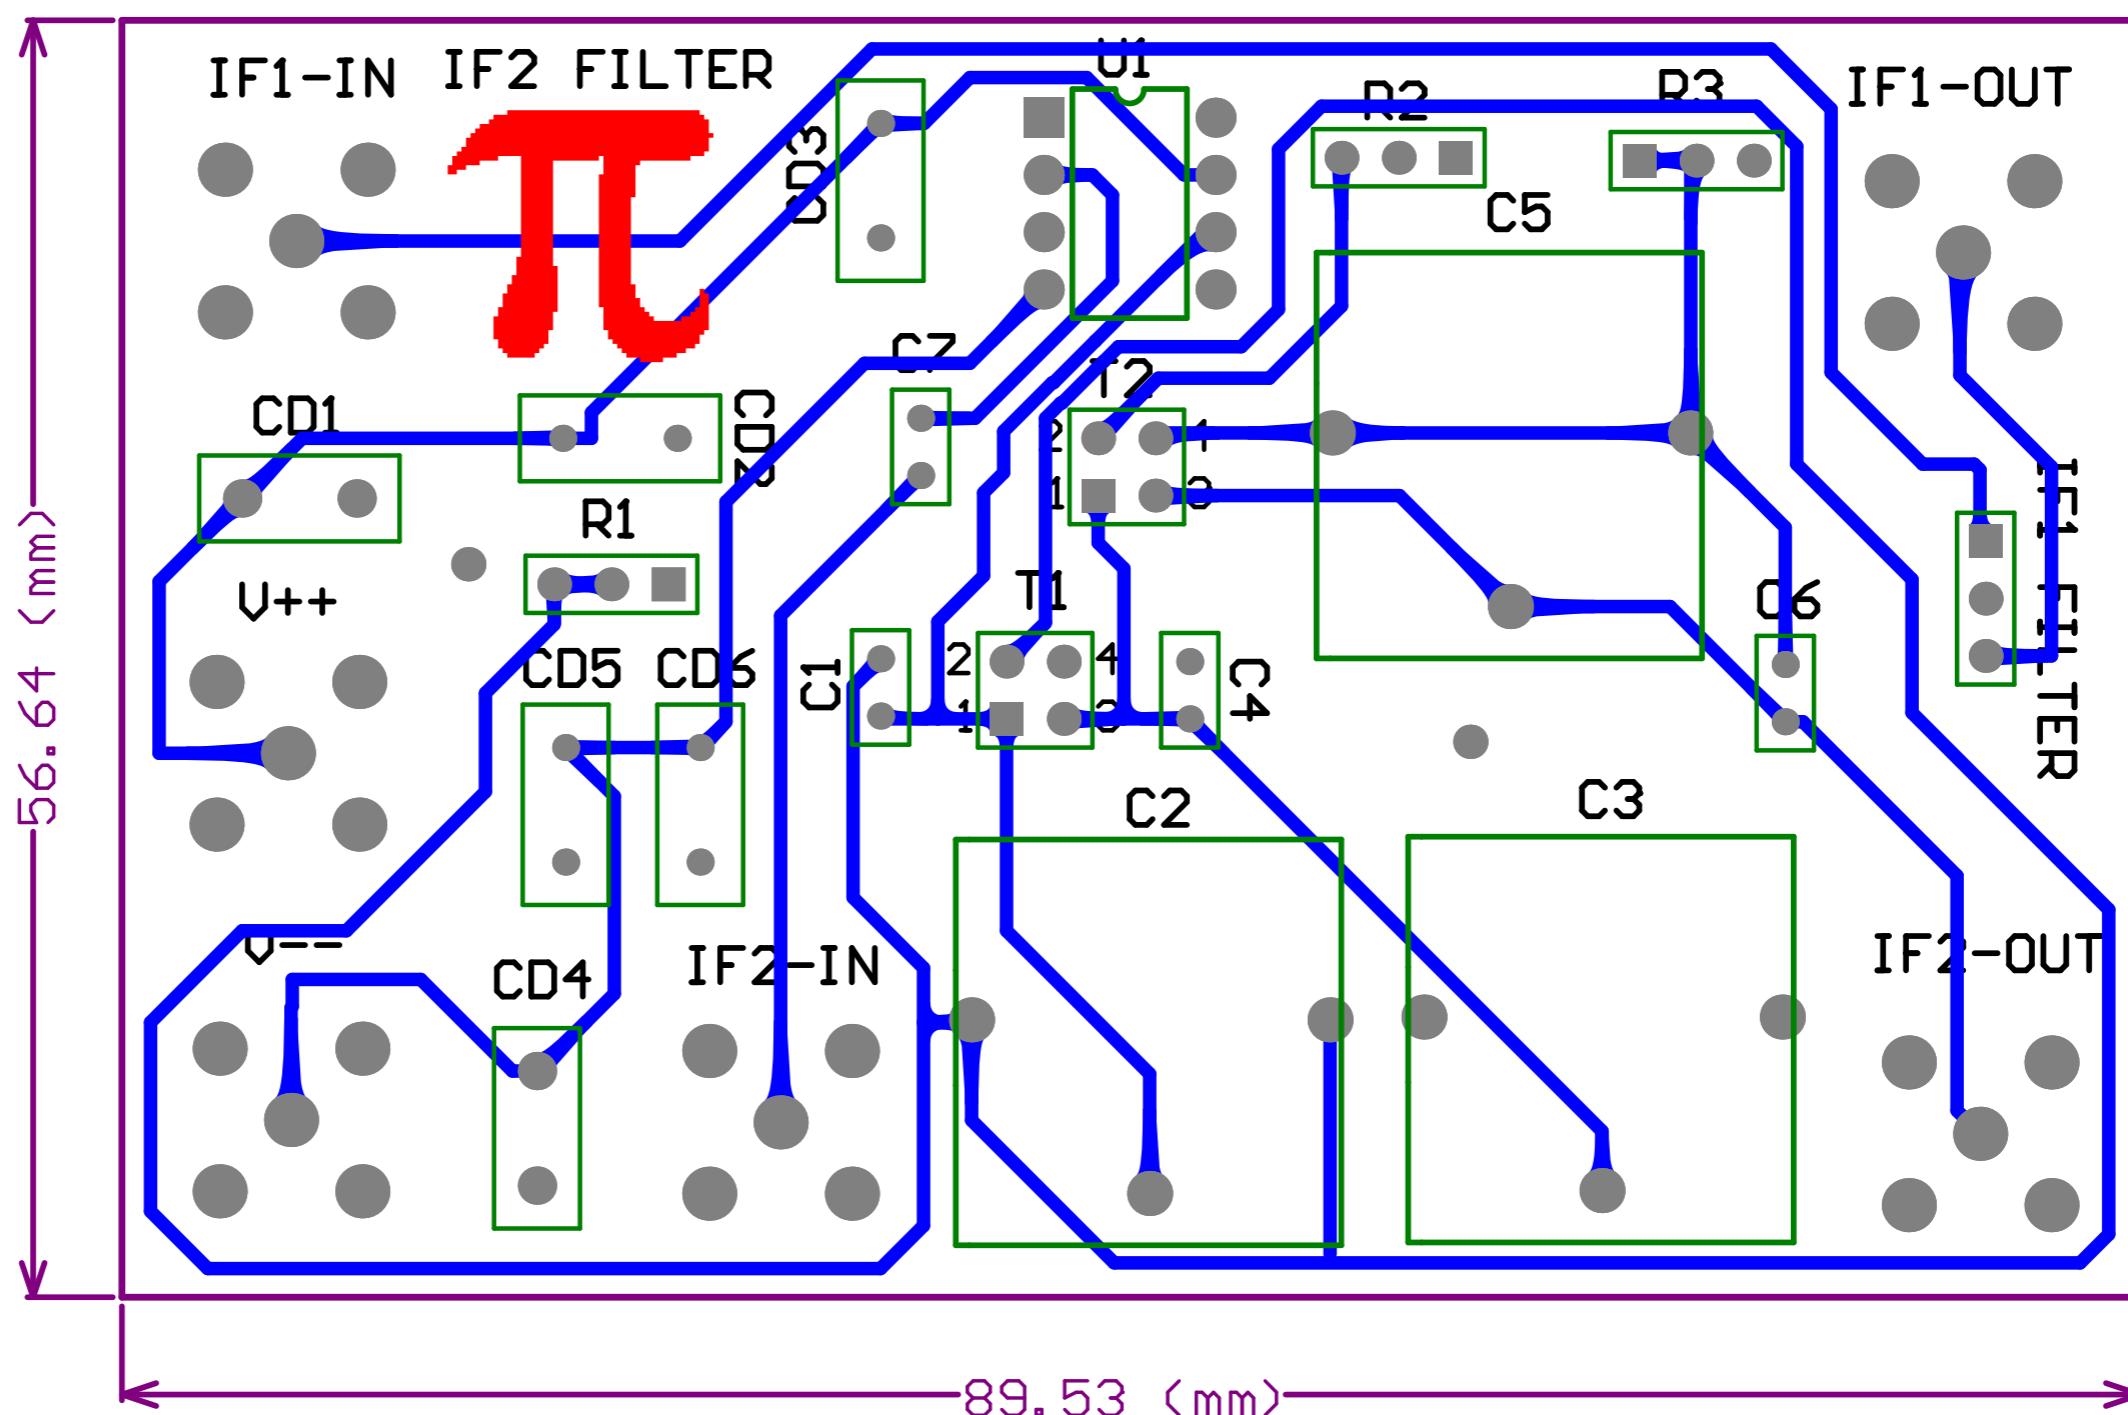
Two layer PCB of the IF1 and IF2 filter
